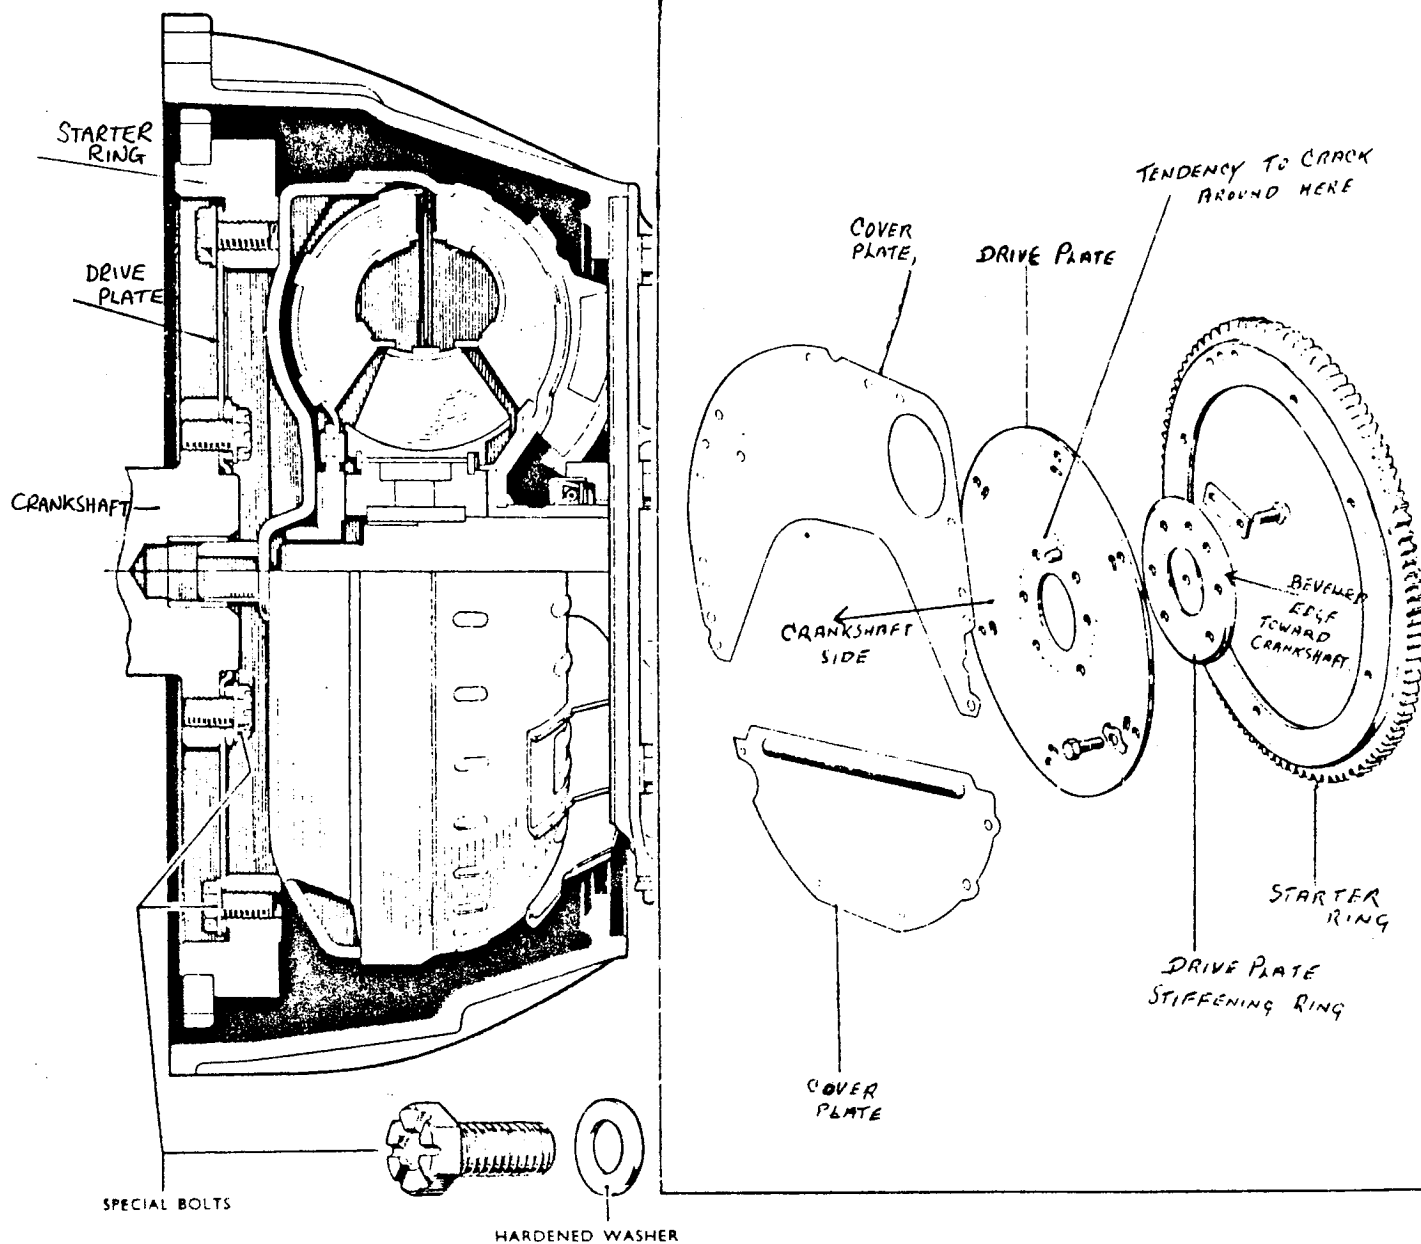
Converter attachment points to engine drive plate and gearbox external fittings
